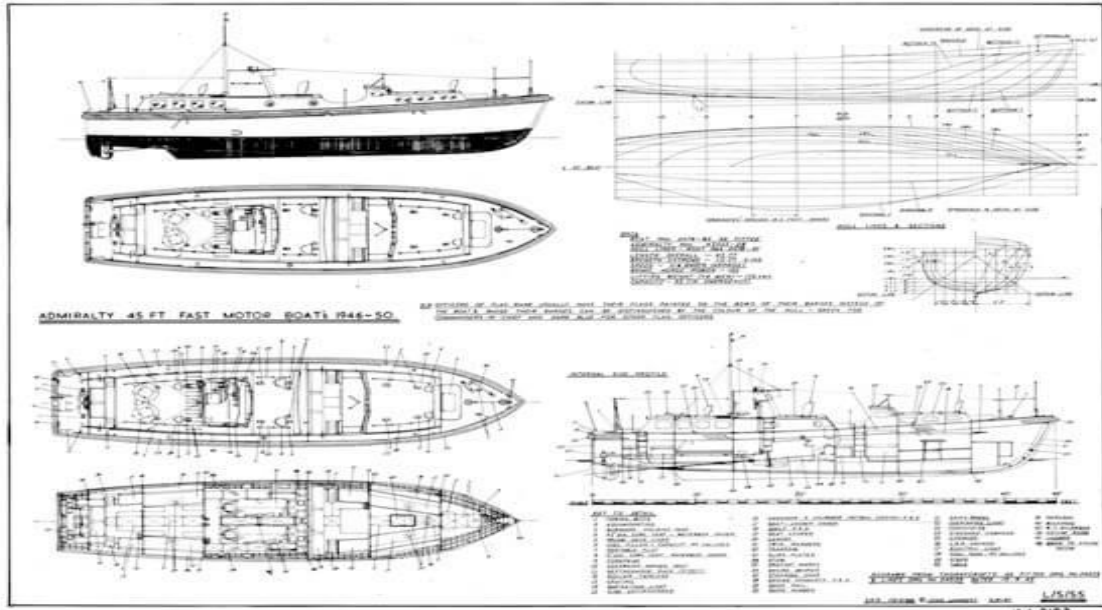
Plan of a ship drawn using hand tools; adapted from (sarikhobbies, n.d.)
